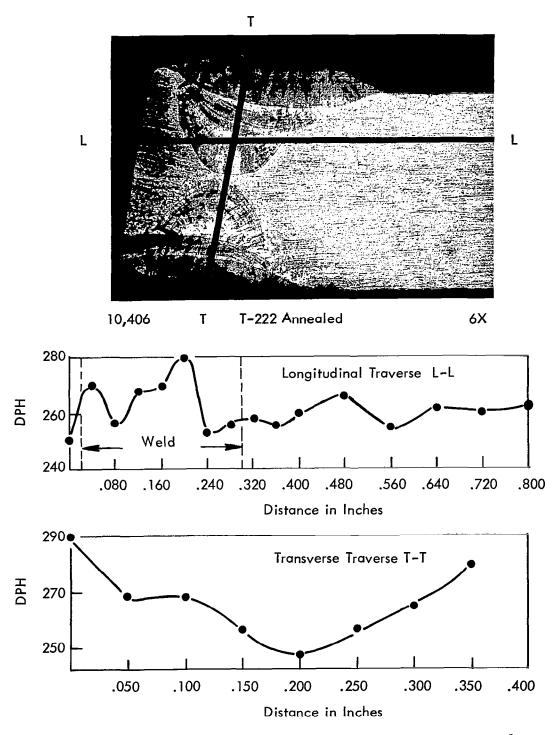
T-222 Plate Weld Annealed One Hour at 2400°F
